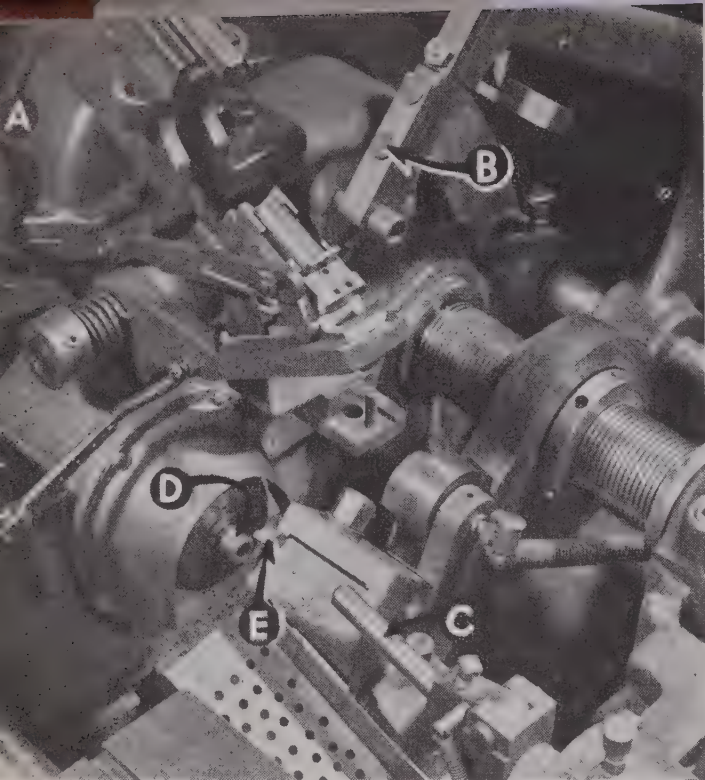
Automatic lathe for cutting circumferential groove in OD of certain bushings. Magazine (A), feeds to pickoff (B) which transfers the bushings in line with collet (D) into which plunger (C) pushes the bushing. Tool holder (E) is rocked upward and its carbide cutter machines the groove. The bushing is then ejected into the perforated chute.
